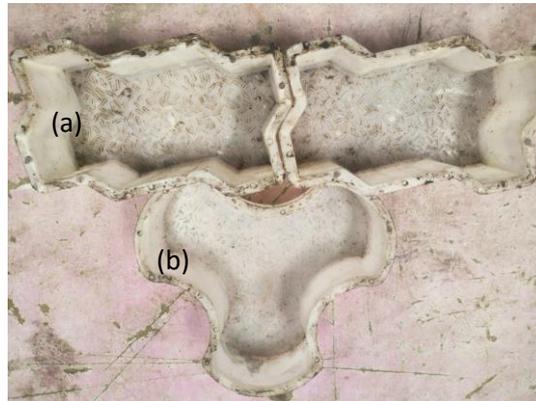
(a) ZIG ZAG MOULDS & (b) MILANO SHAPE MOULD
